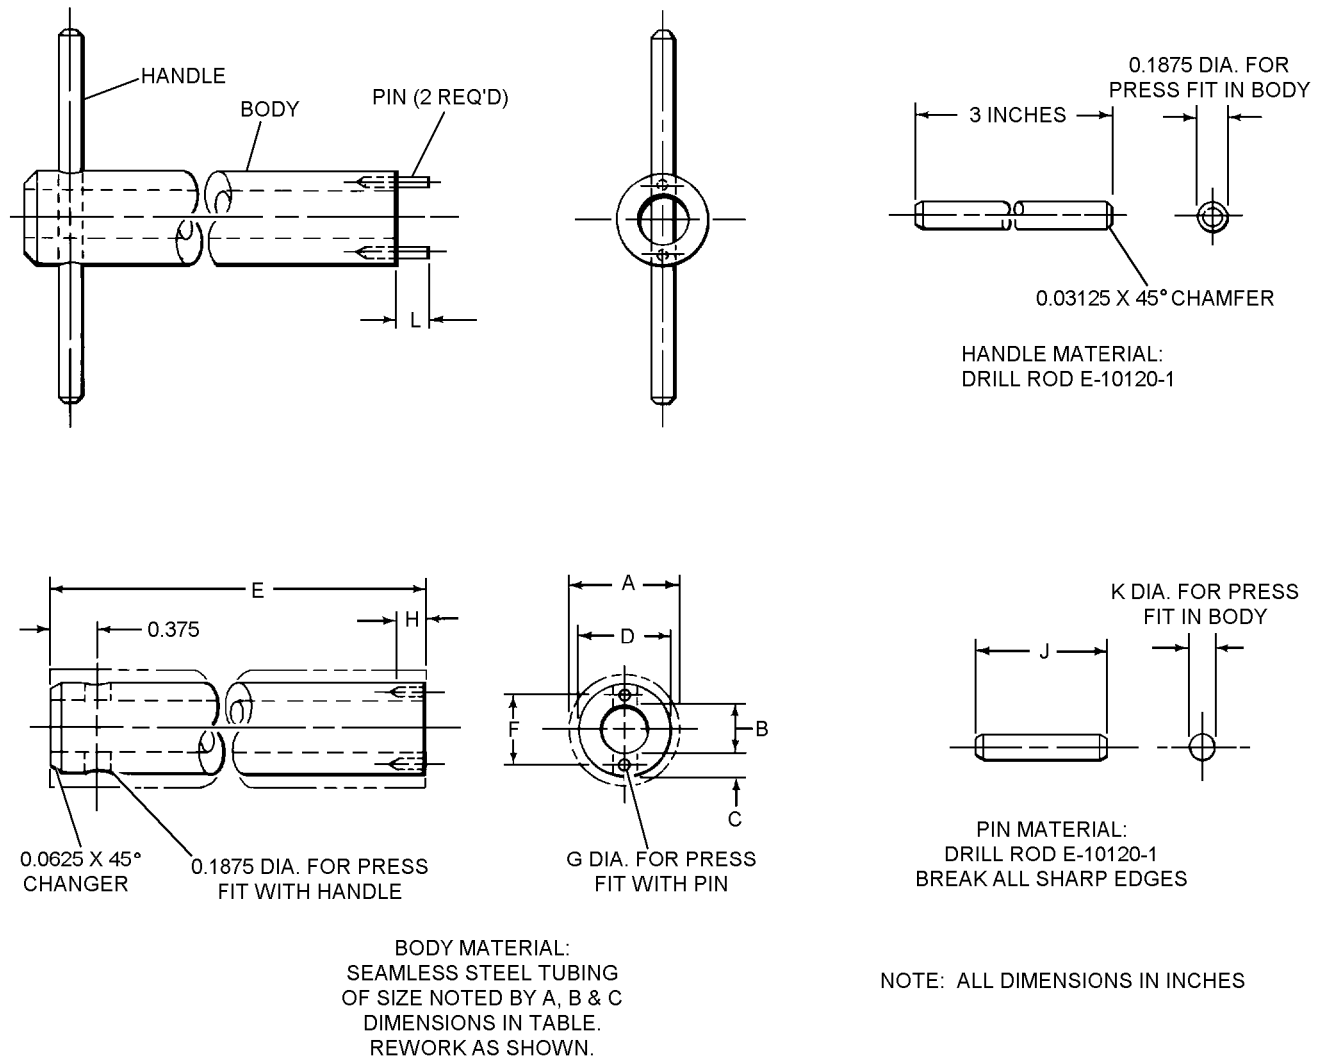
Special Tools and Test Equipment (Sheet 1 of 3)
